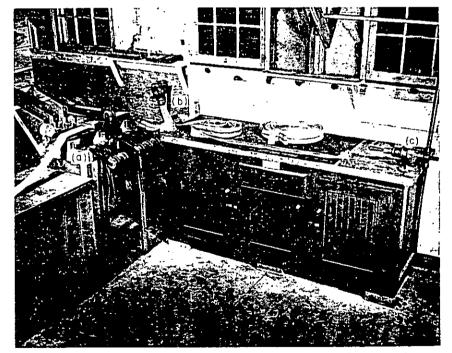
Hose-repair equipment: a, Vulcanizing press; b, hose crimper; c, expander tool for recoupling.
